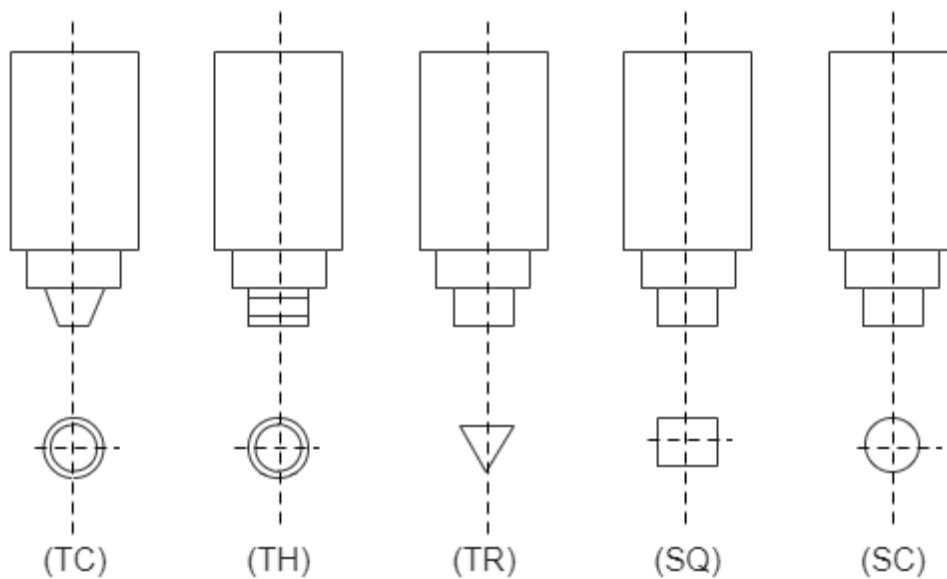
FSW/ FSP tool pin profiles [38]
